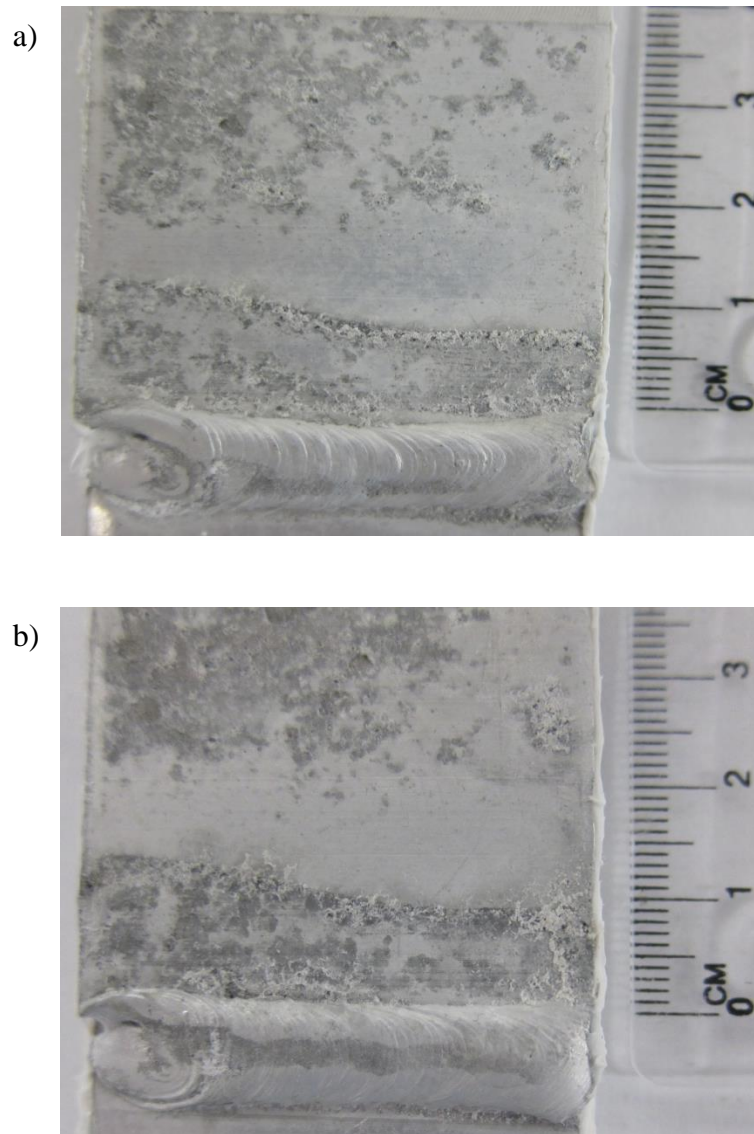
Close-up images of duplicate samples of lap-joint welded configuration I3 (ER5356/AA7108/≡) in the as-welded T6+PB condition.
